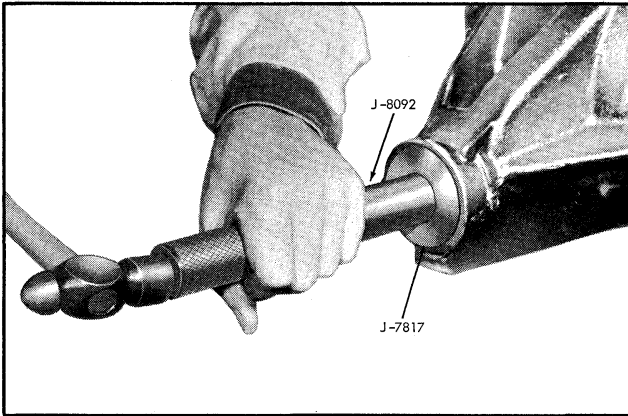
Installing Front Pinion Bearing Outer Race
